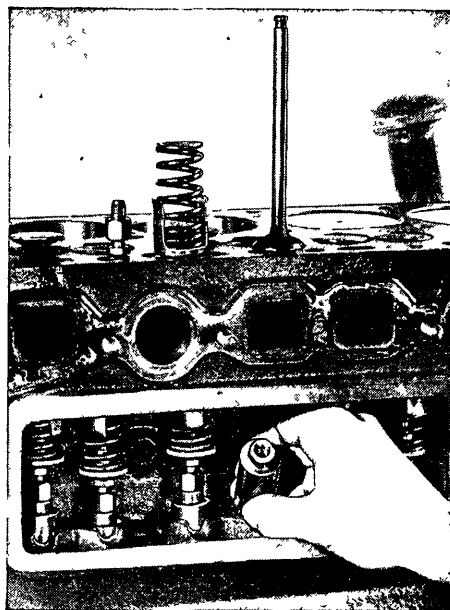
Removing valve lifters on Commander and Dictator engines prior to 1947
